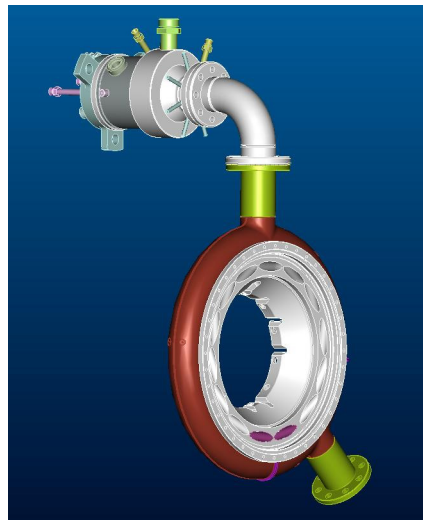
A modelling of the gas generator assembled with a turbine manifold
